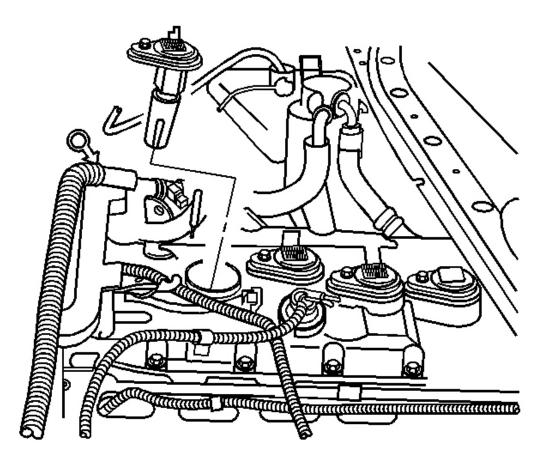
View Of Ignition Control Module Courtesy of GENERAL MOTORS CORP.
